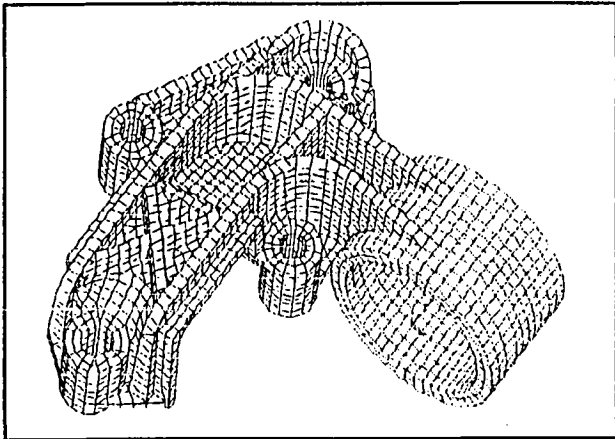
Engine to car body connecting support - Aluminum alloy AS7G03 -
